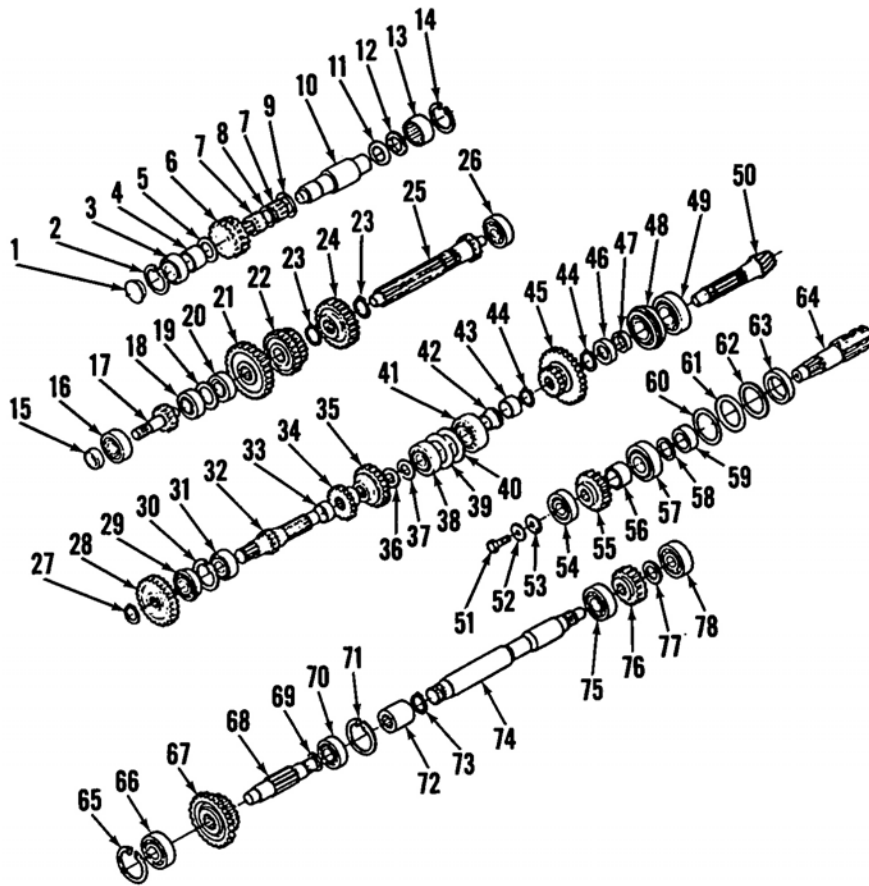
Exploded view of transmission gears, shafts and other components showing relative installed position used on Model B5100E.
